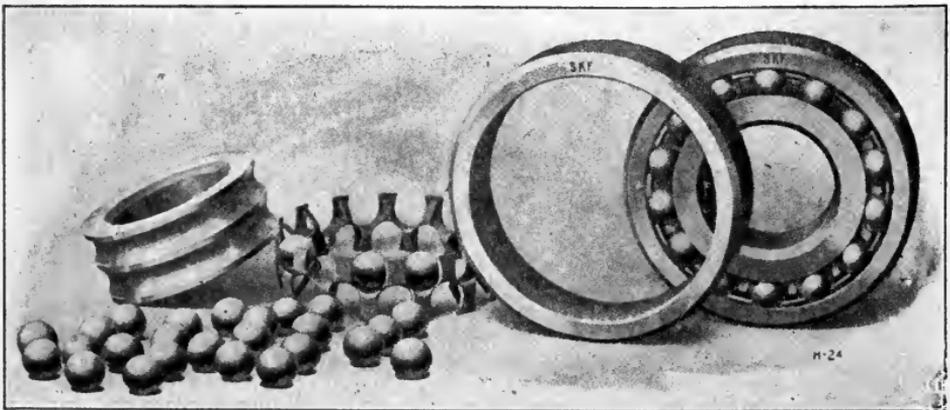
S. K. F. Radial Bearing Showing Parts and Assembled Bearing Complete
